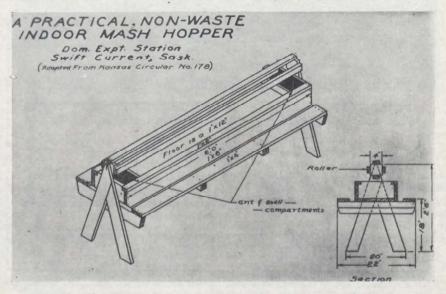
Construction details for a practical non-waste laying mash hopper.
